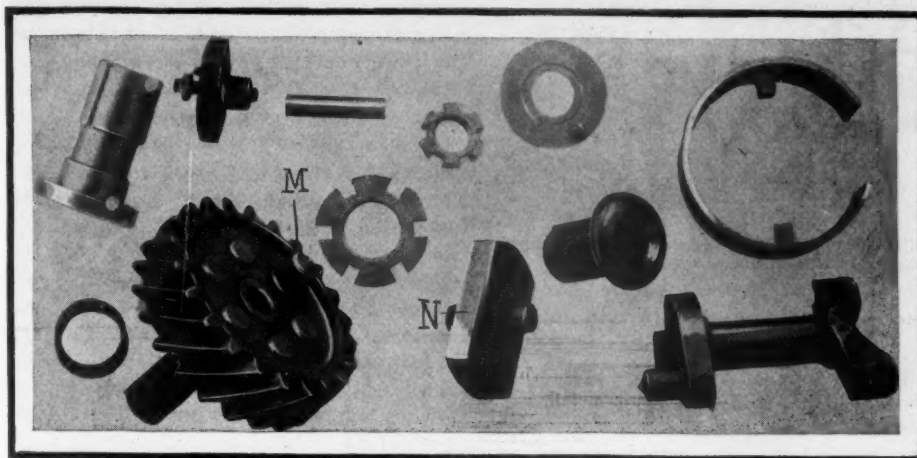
THE SEPARATE PARTS OF THE CID ROTARY VALVE DEVICE
